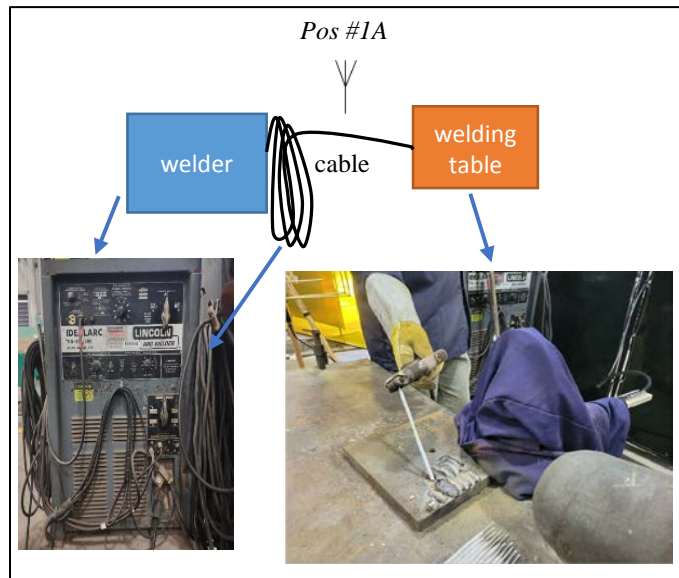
Configuration A—the welder, cable, and welder close by.
